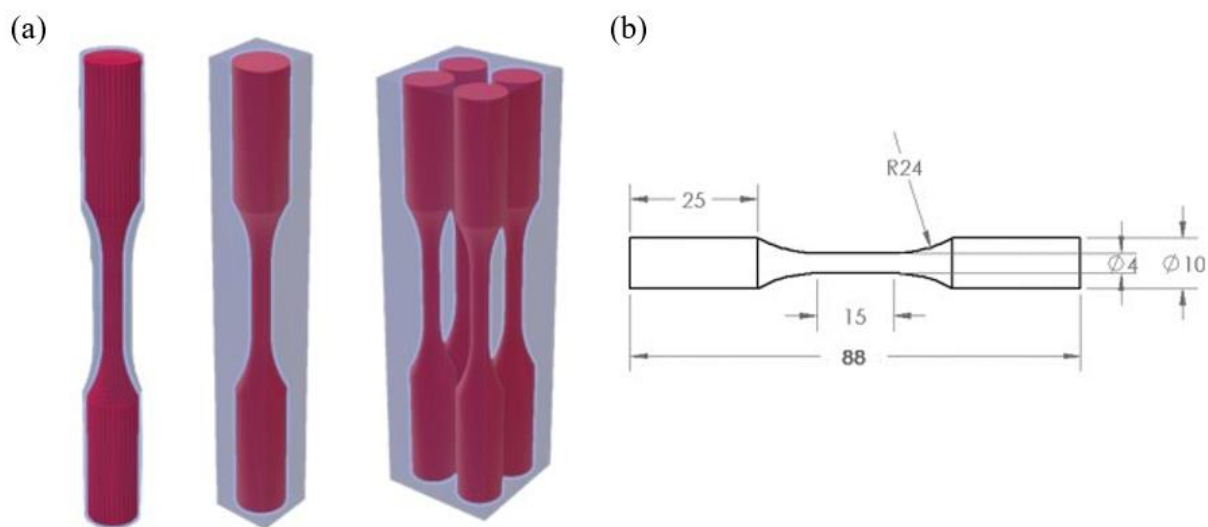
(a) Schematics of dog-bone parts, small blocks, and large blocks from which specimens were machined to the geometry and dimensions designed according to ASTM Standard E606 (b) Dimension of the dogbone specimen; all measurements are in millimetres. [4] [57]
